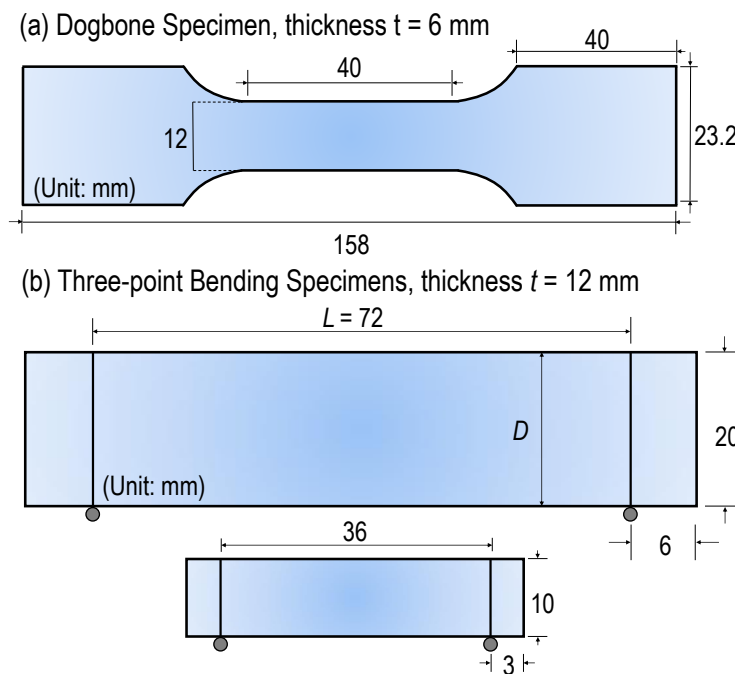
(a) Dogbone specimen for uni-axial tensile tests; (b) Geometrically-scaled rectangular specimens for three-point bending tests.
